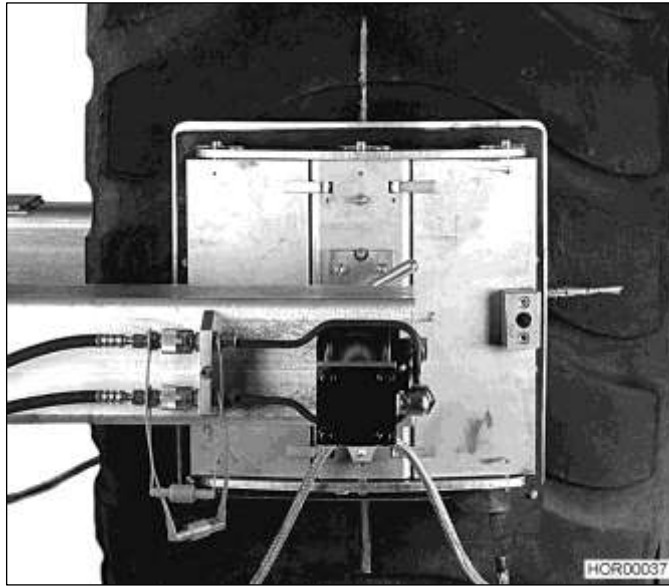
Attaching the contour aluminum plate to the outer heating plate
